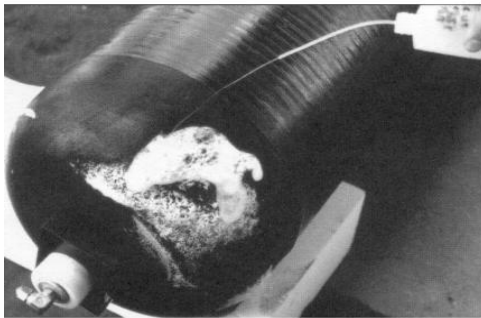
Leak Checking Container with Soapy Solution (Type 4)
